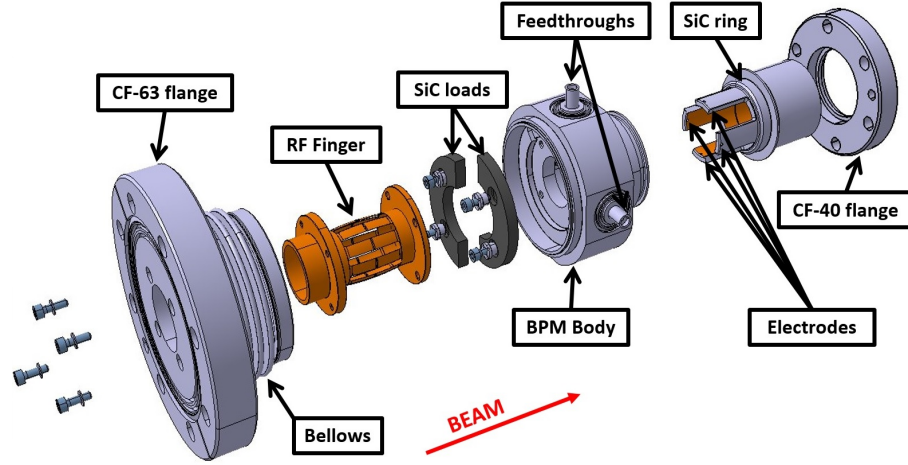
Assembly view of the compact stripline BPM prototype for the CLIC Drive Beam.
